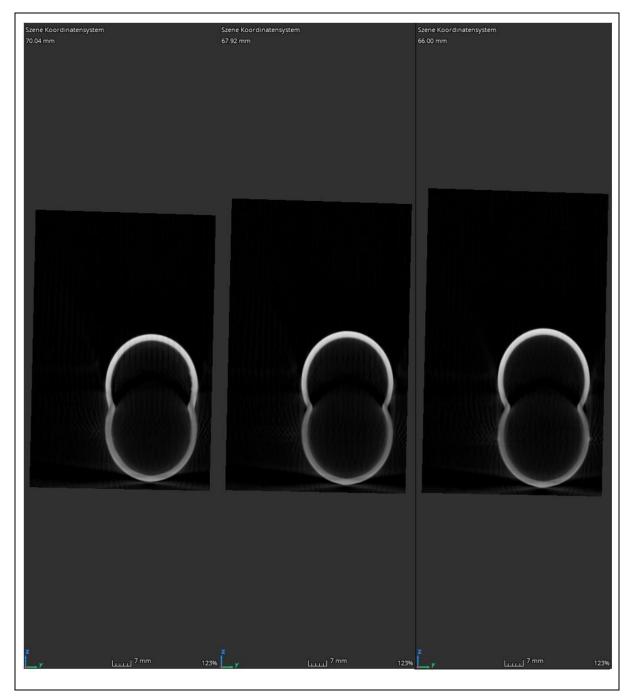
Right weld (No.2) side view picture 4-6
